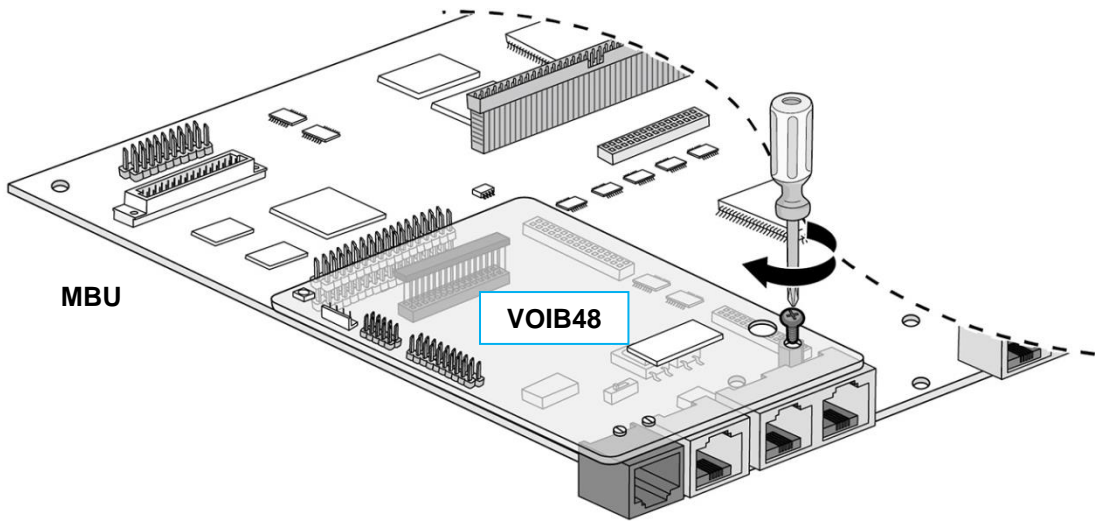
VOIB48 on MBU Board Installation
